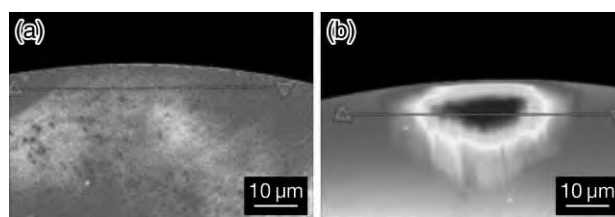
Rake face of diamond tool (a) before, and (b) after machining a lens array pattern.
